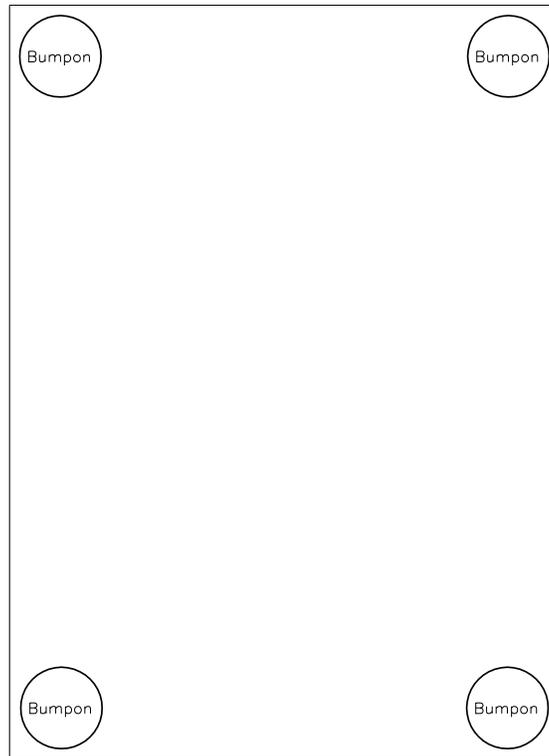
TPS53310EVM-755 Bottom Assembly Drawing, Bottom View
